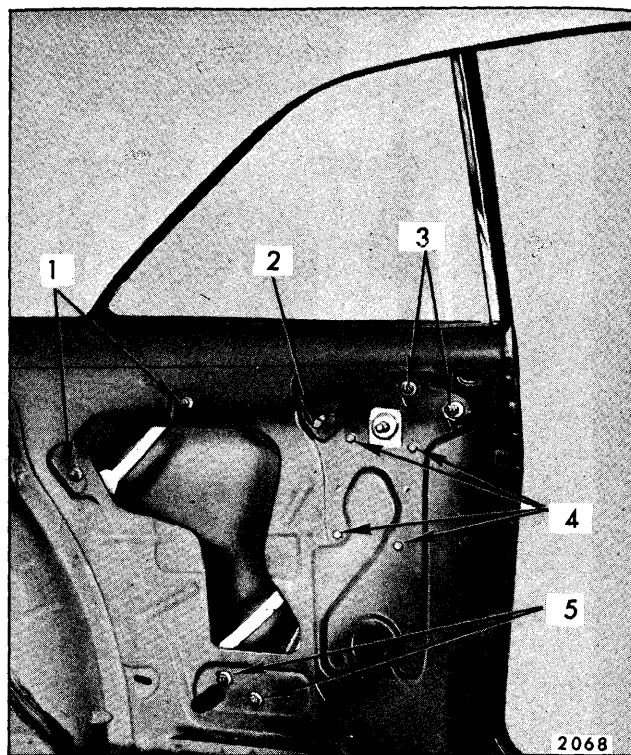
Rear Quarter Hardware - "A-17" Style
